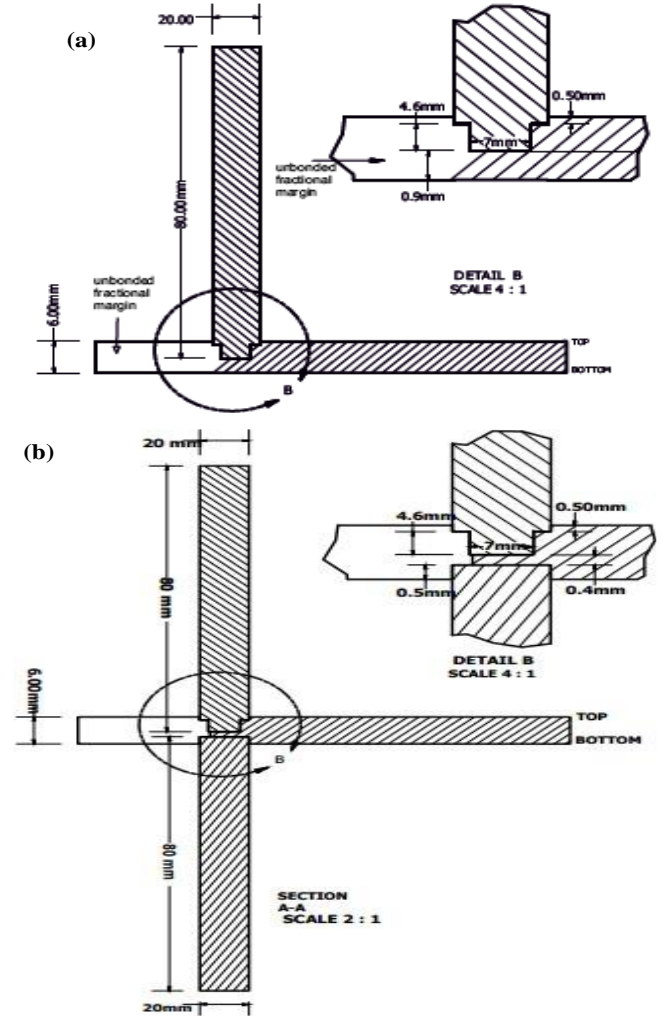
Schematic of the plan/butt configuration for the FSW welding process (with dimensions).
